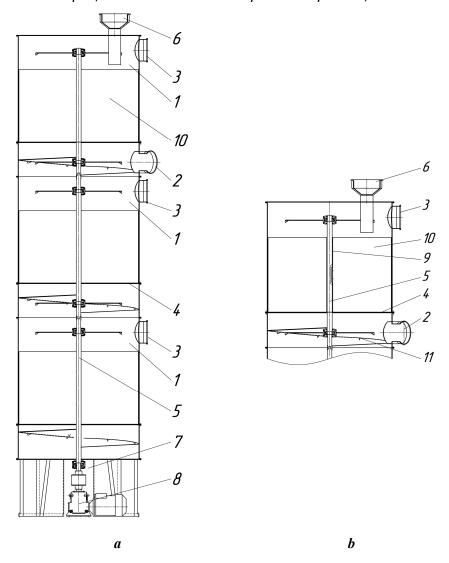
The Rotary Dryer (a – sectional view of dryer, b – drying chamber): 1 - drying chamber; 2 - pipe of coolant supply; 3 - drainage pipe; 4 - perforated grid; 5 - drive shaft; 6 - boot device; 7 - unloading device; 8 - drive; 9 - tube; 10 - blade; 11 - partition
